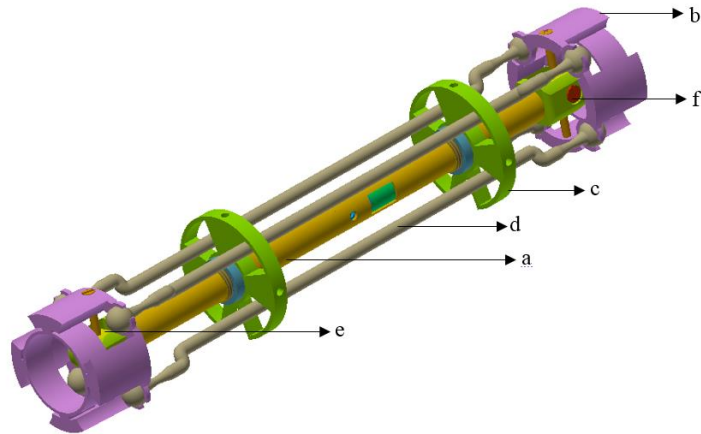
CAD of Parallel Manipulator with 2-DOF. (a) Main inner shaft, (b) Platforms, (c) Shaft Platforms, (d) Double spherical ended curved shafts, (e) cardan cube, (f) cardan u.
